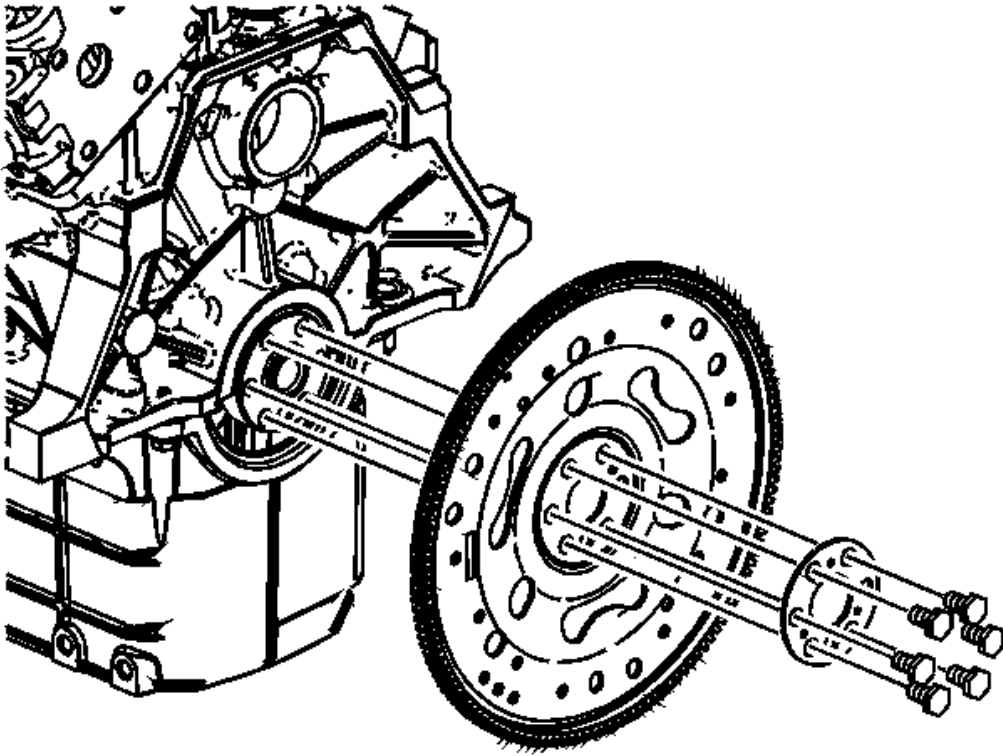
Identifying Flywheel & Bolts (Automatic Transmission)
